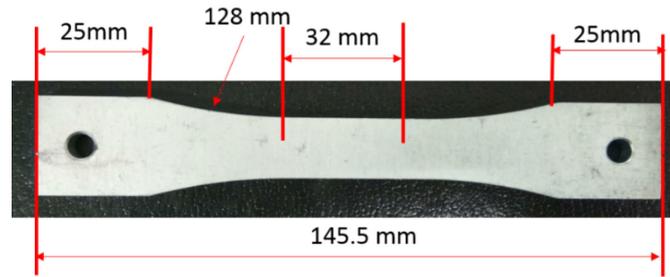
ASTM A516 Grade 70 Testing Sample Dimension
